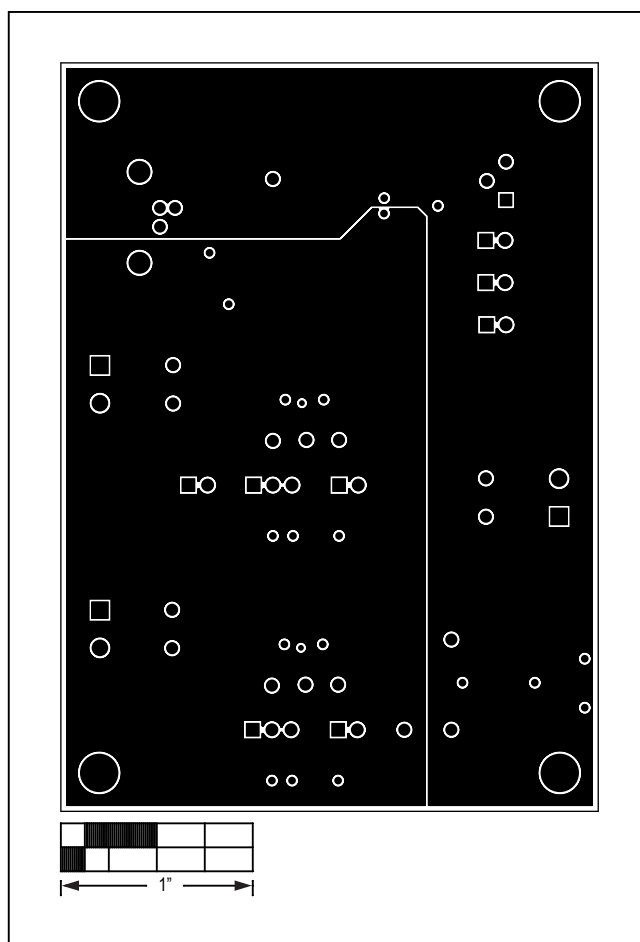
MAX14670 EV Kit PCB Layout—Internal Layer 2
